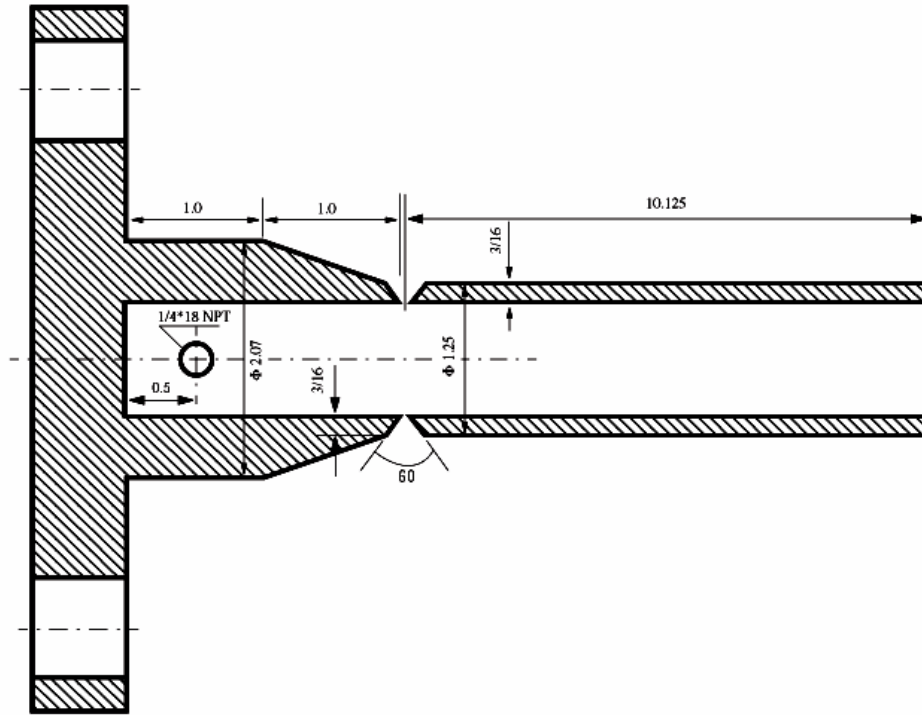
Geometry of butt-welded specimen (1 in = 25.4 mm) (Lu [2003])
